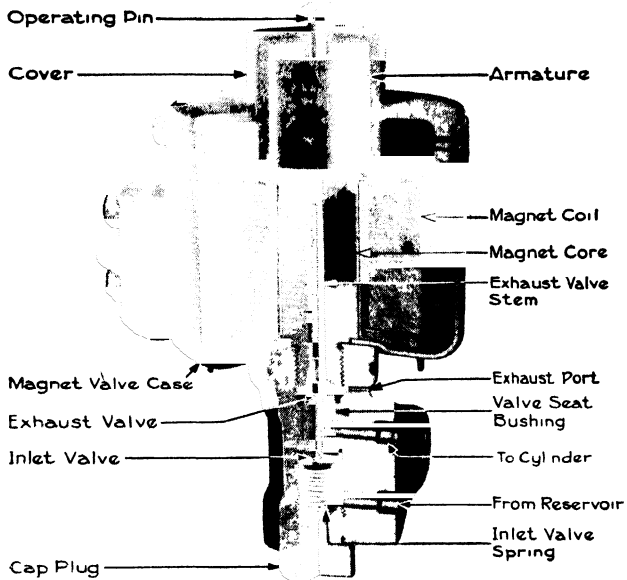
Enclosed Coil, "ON" Type Magnet Valve
